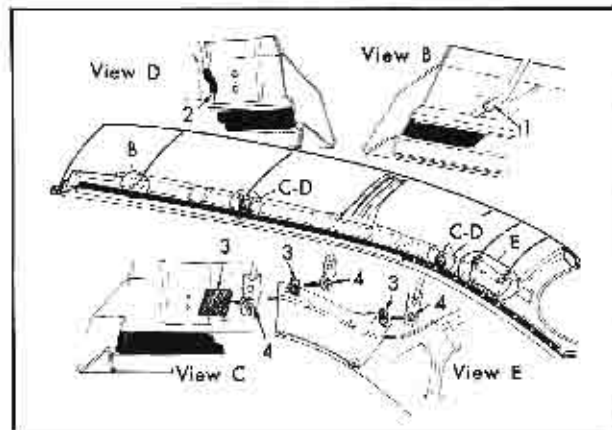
Removal of Headlining Support Wires - (6237)
